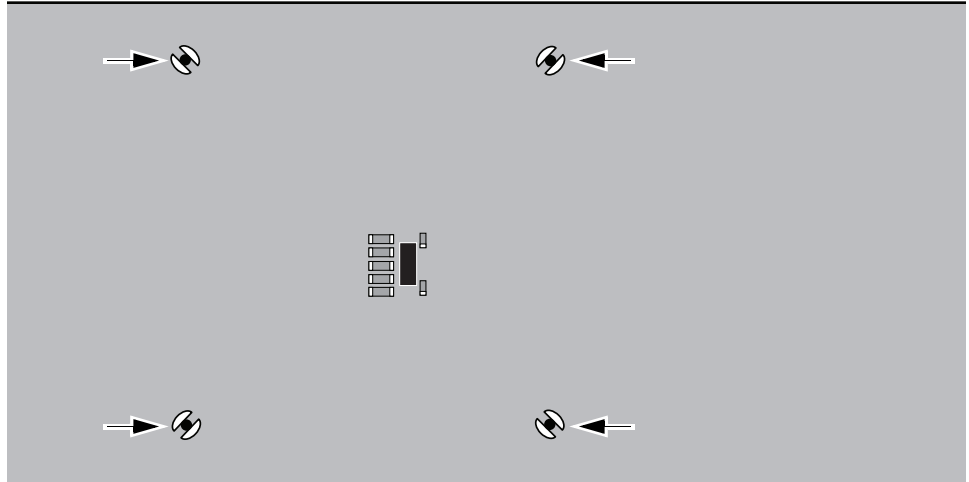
Inspecting the cooling assembly pins on the underside of the motherboard
